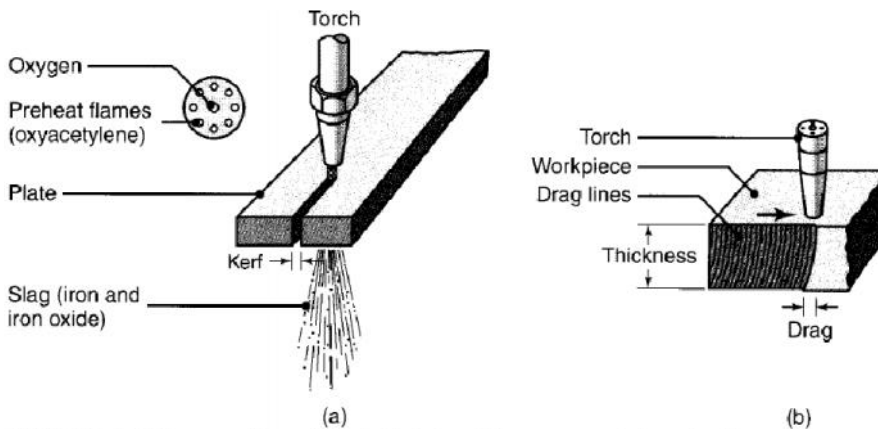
FIGURE (a) Flame cutting of a steel plate with an oxyacetylene torch, and a cross section of the torch nozzle. (b) Cross section of a flame-cut plate, showing drag lines.
